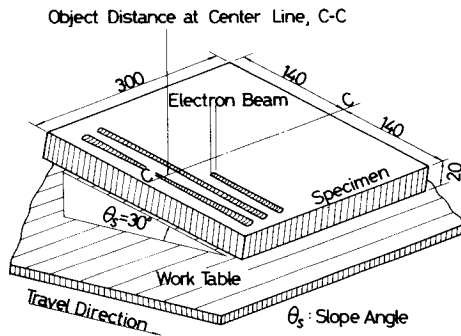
Bead-on-plate Welding Method by Slope Welding
